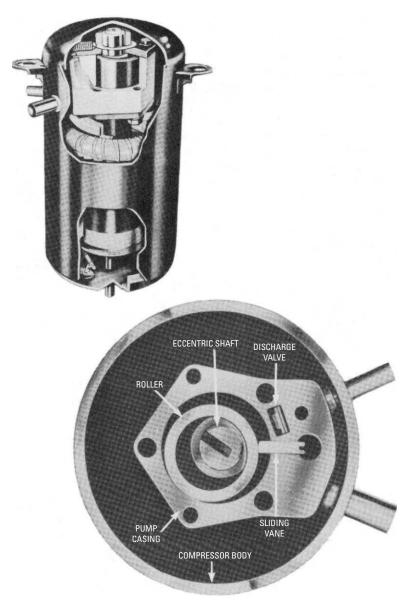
Eccentric shaft and roller of a rotary compressor. (*Courtesy Mueller Climatrol Corp.*)
